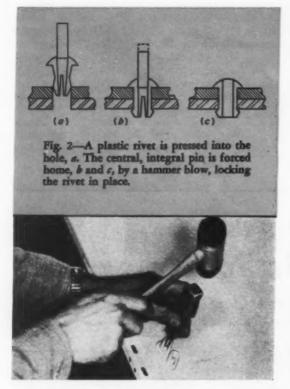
Molded plastic shelf support for a refrigerator combines plastic rivets with the support. Easy assembly is the prime feature of the unit.
